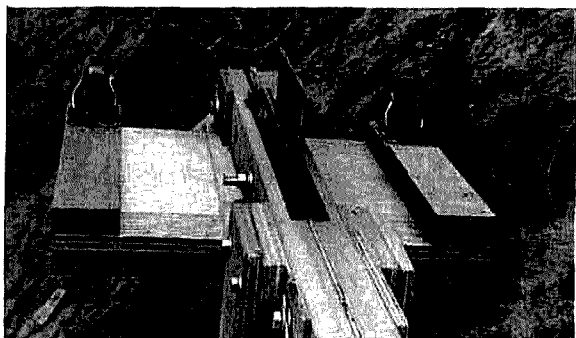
Bottom view shows blade, tack-welded to angle iron screwed into position. Wire guide tube is welded to trailing edge of blade (foreground).
